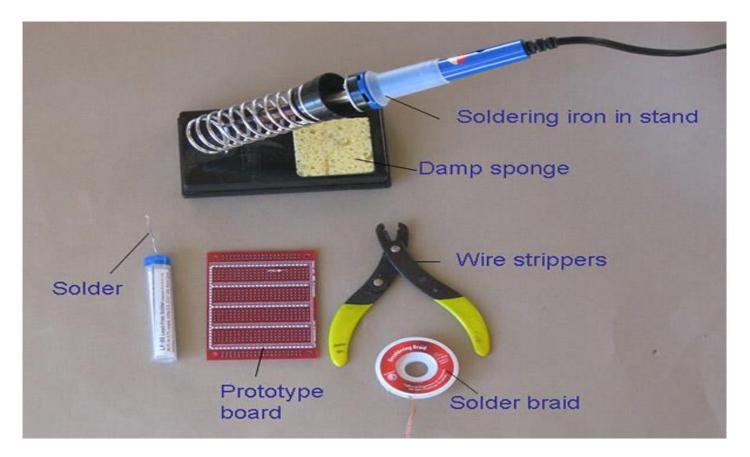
Soldering equipment and materials. The solder in this picture is coiled inside a plastic tube; it is pulled through the top as needed. The spring on the stand holds the hot soldering iron. The damp sponge is used to clean the tip of the iron. Solder braid is used to remove solder; solder is "soaked up" into the braid when it is heated by the soldering iron. The wire strippers can be adjusted to strip the plastic covering off of various thicknesses of wire. The prototype board is used to connect electronic components in a circuit.
